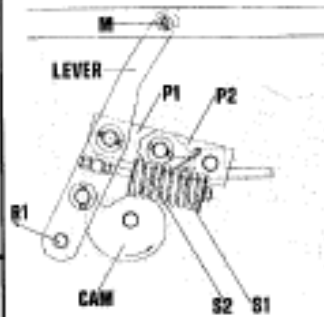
, 12, 13 and 14 illustrate sequential operation of the assembly. The motor operator lever is connected to the switch actuating bar at point M. The actuating bar linkage is connected to the pull rods (not shown) of each module assembly.
